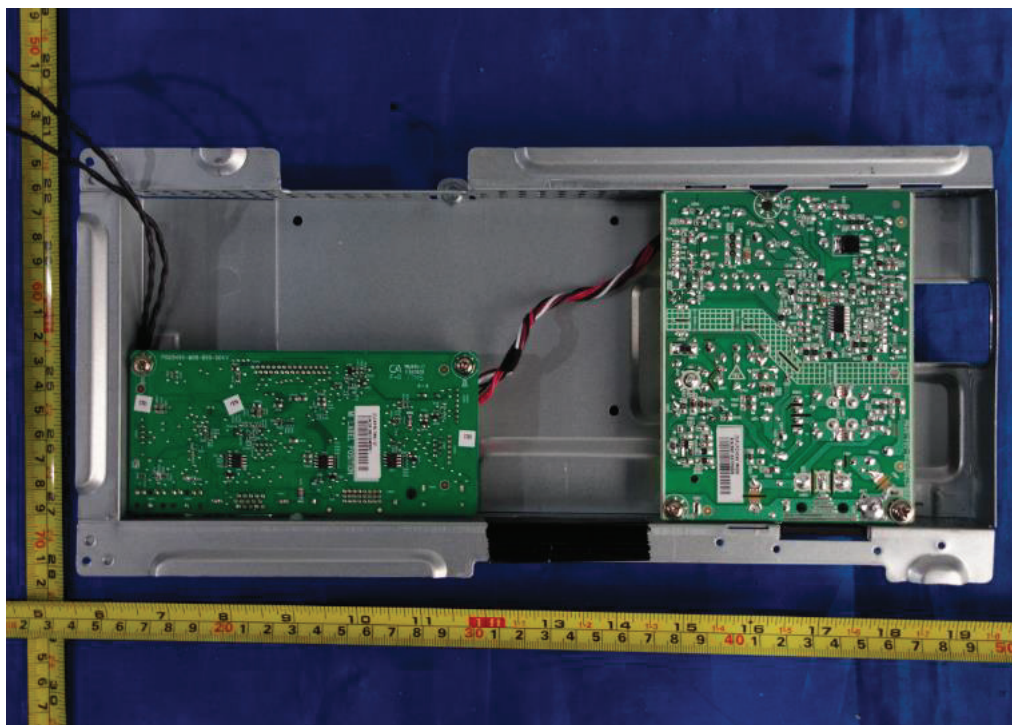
Metal enclosure type B with power board 715G7300 and main board 715G9494
